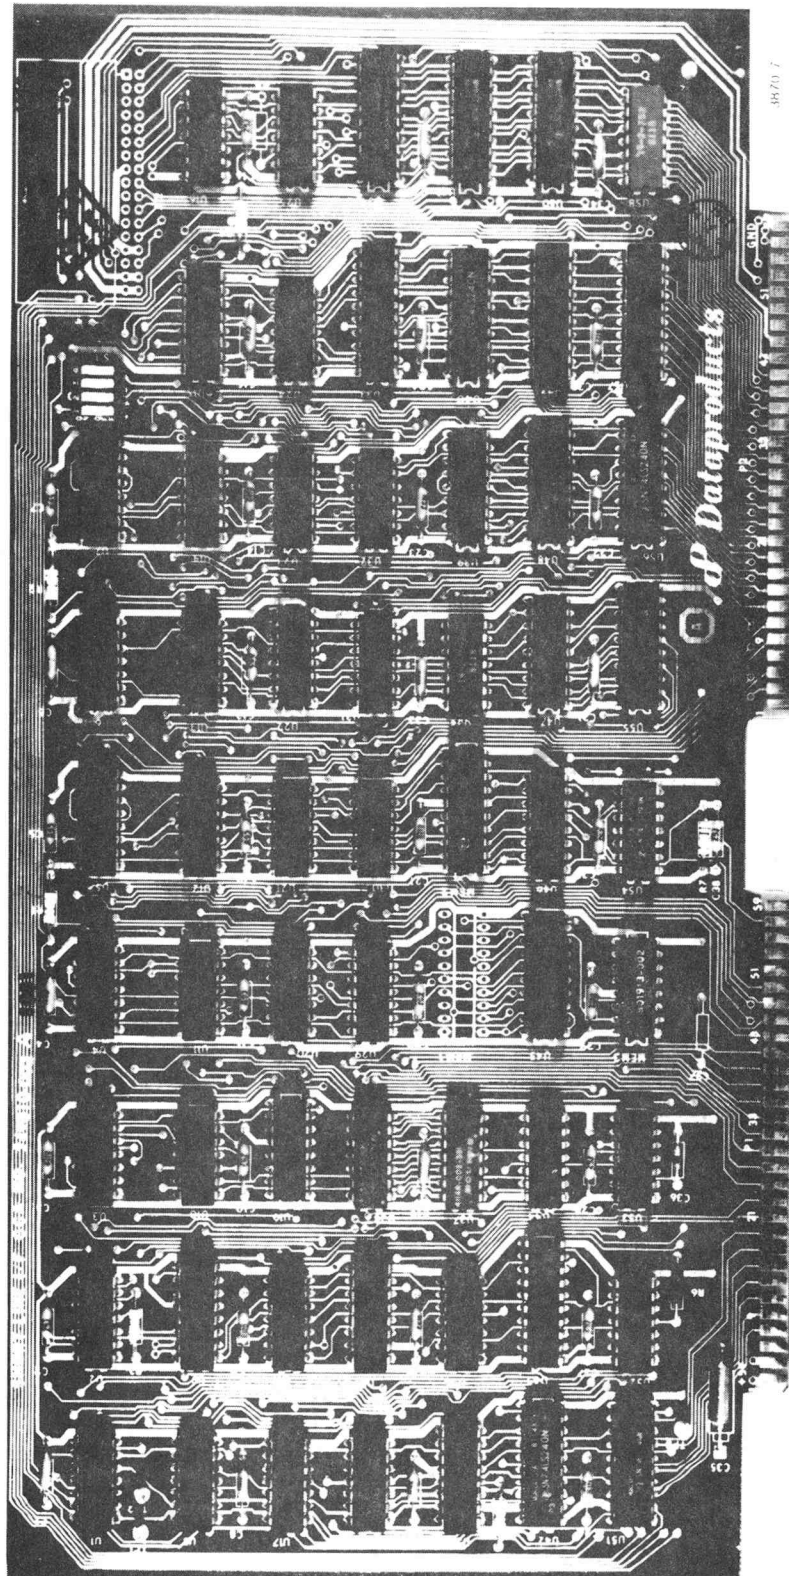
DP-14 Short-Line Parallel Interface Circuit Card Assembly
